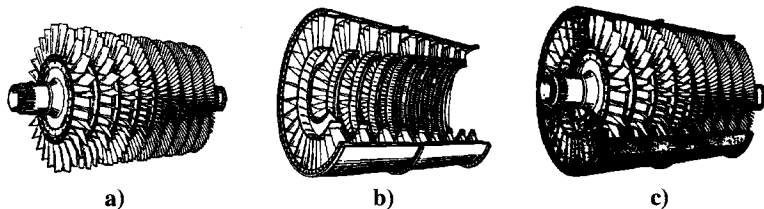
Axial-flow compressor: a) rotor with blades, b) case with stators, and c) compressor assembly. (Courtesy of Pratt & Whitney).
